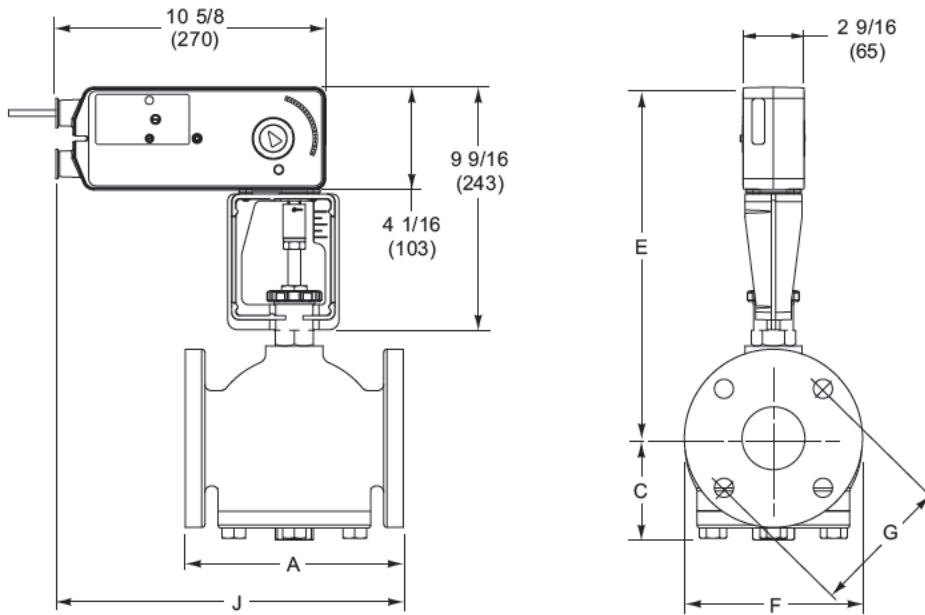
Mx61-720x with 2-1/2" to 4" N.C. 2-Way Flanged Globe Valve.
